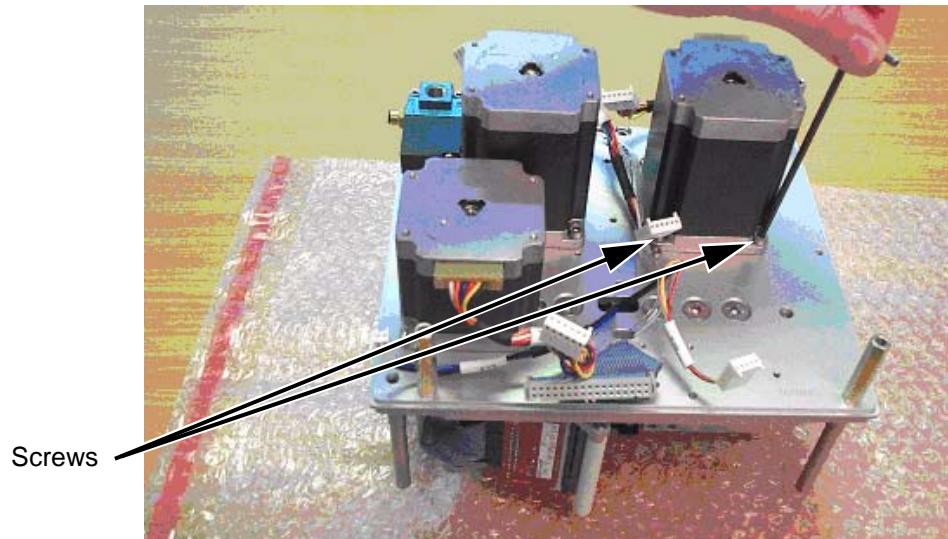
Ribbon Motor Drive Assembly-Screws
